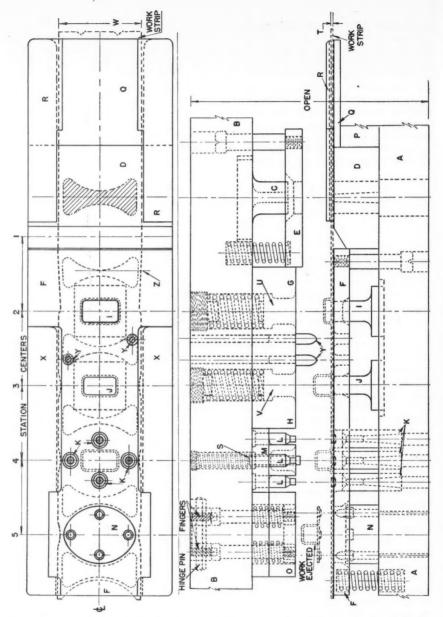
Design of press tool as developed from the scrap strip. The drawing shows the five progressive stations, indicates the mechanical operation performed at each station, and illustrates the usual drafting technique.
